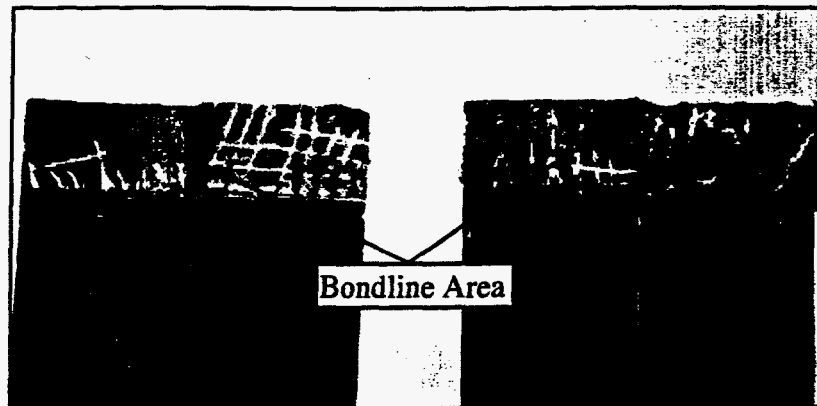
Lap shear tested coupons using the 11L paste adhesive.
